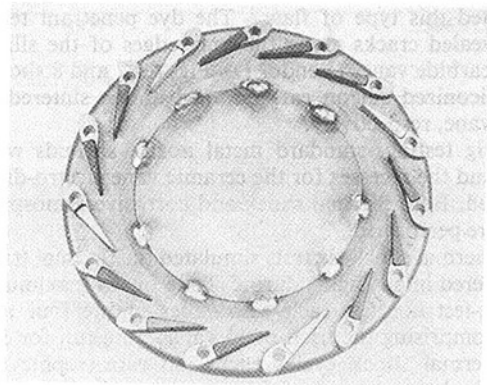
Nozzle aft shroud with ceramic vane inserts (modified for rig tests)
